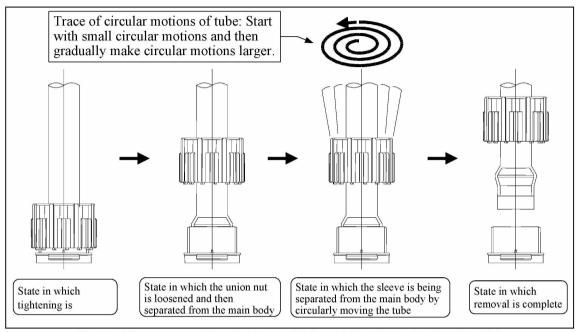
How to remove P series Super 300 Type Pillar Fitting (6 - 25, W2 - W8)
